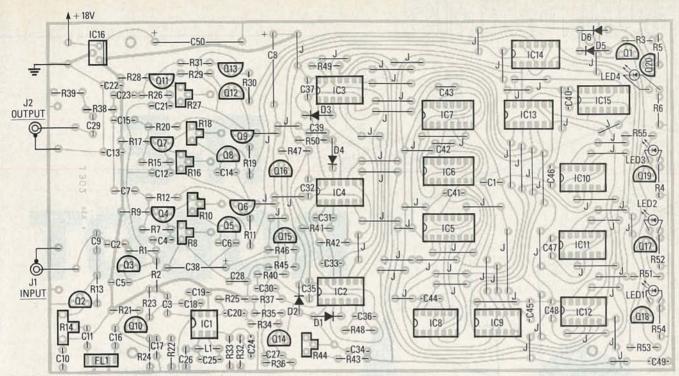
IF YOU CHOOSE TO BUILD an experimental descrambler, a PC pattern is provided in PC Service. Use this guide when mounting parts on the board.
